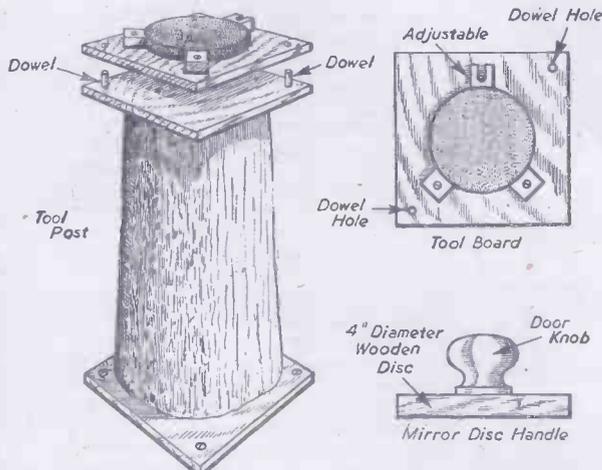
Grinding post and details of tool-board, mirror disc and handle.
